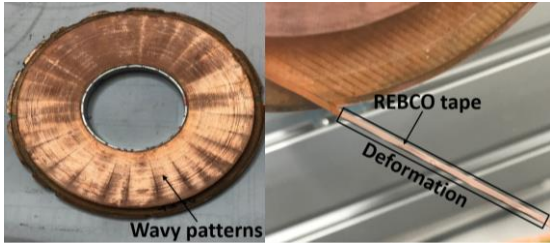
Photographs of surface and conductor of DP9 after disassembling.
